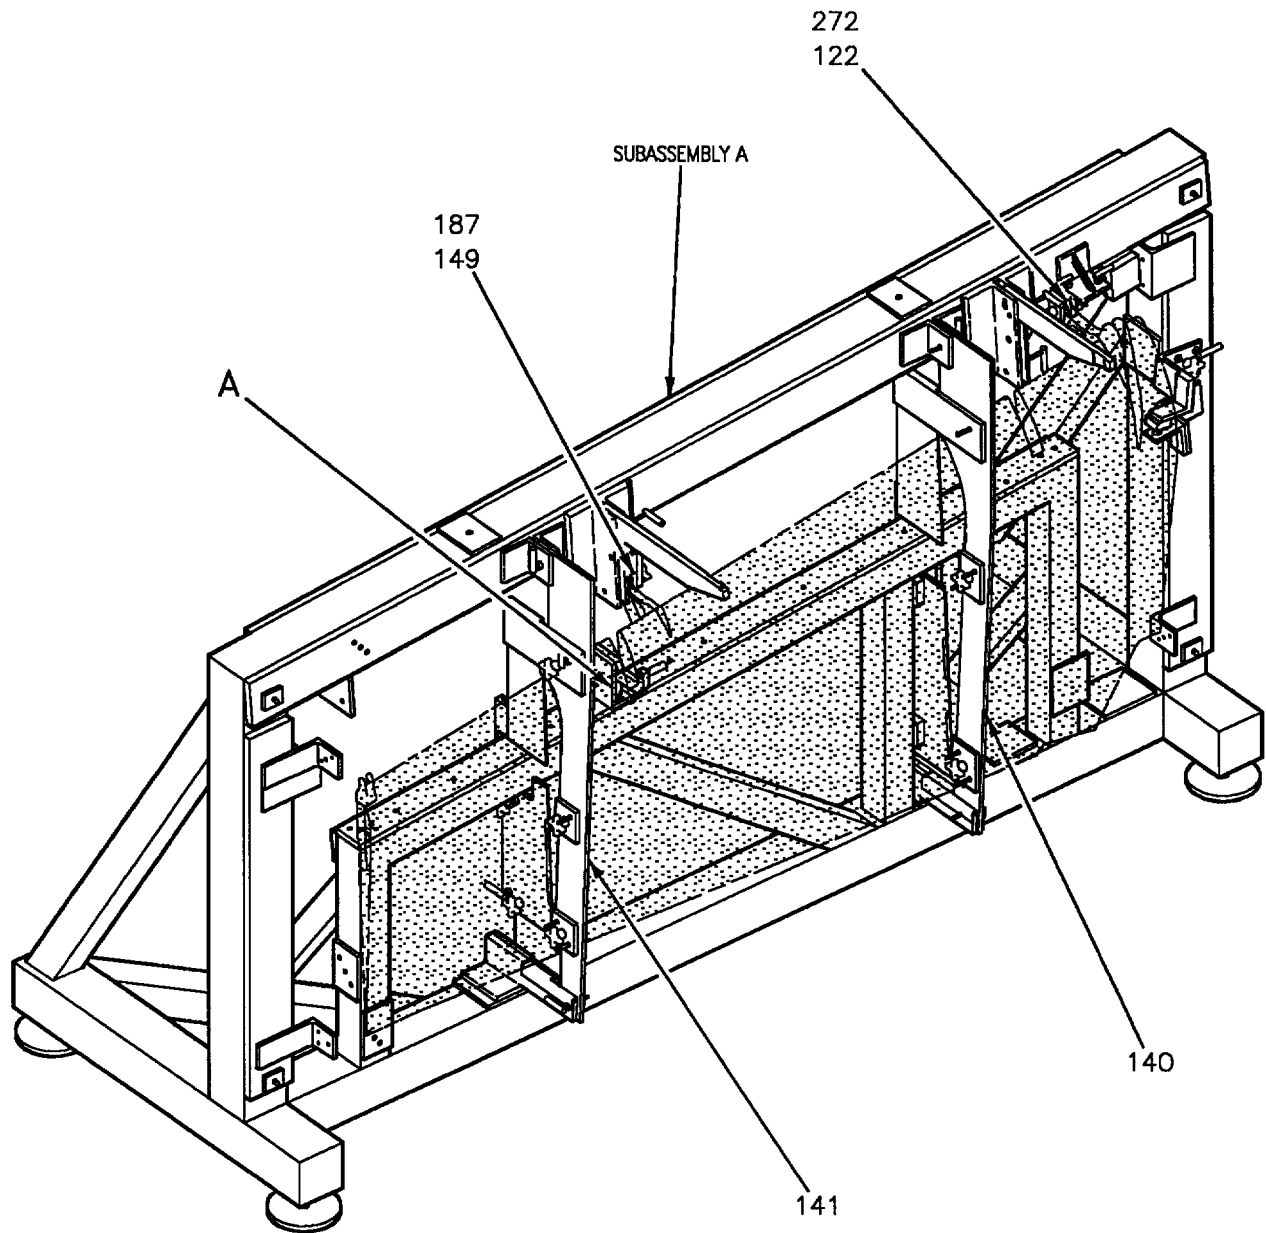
Outboard Hinge Rib, 74A180691 (Sheet 1)
